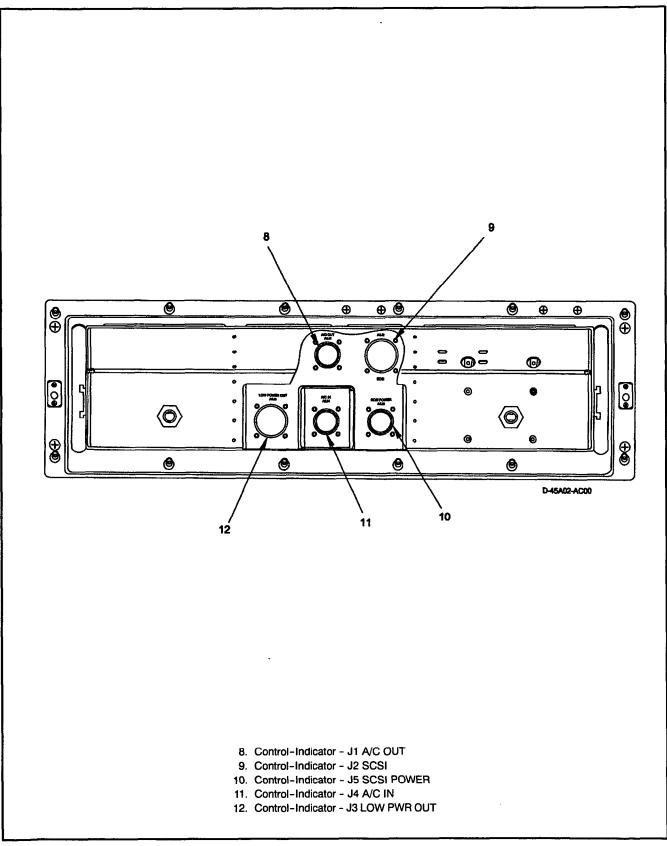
Control-Indicator Assembly C-12514/ASQ-225 and Control Indicator Set AN/ASQ-225 Components (Sheet 2)
